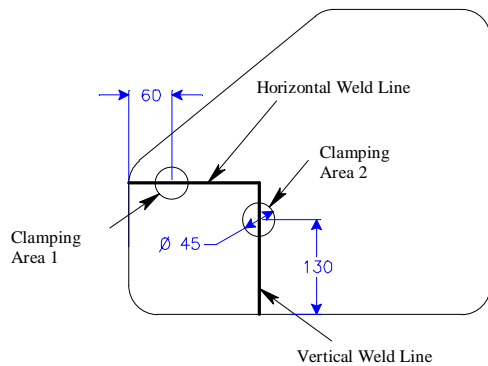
Location and size of clamping force areas. Dimensions in mm.
